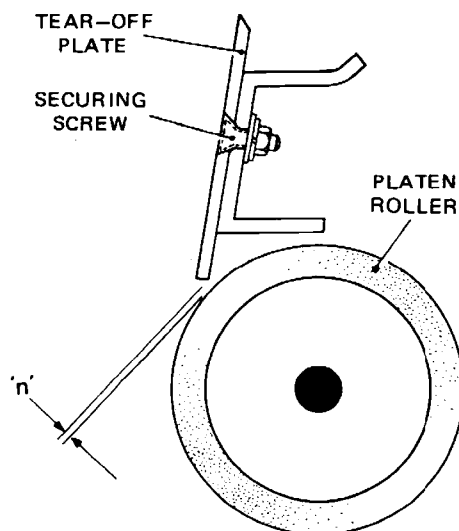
TEAR-OFF PLATE (END VIEW)
